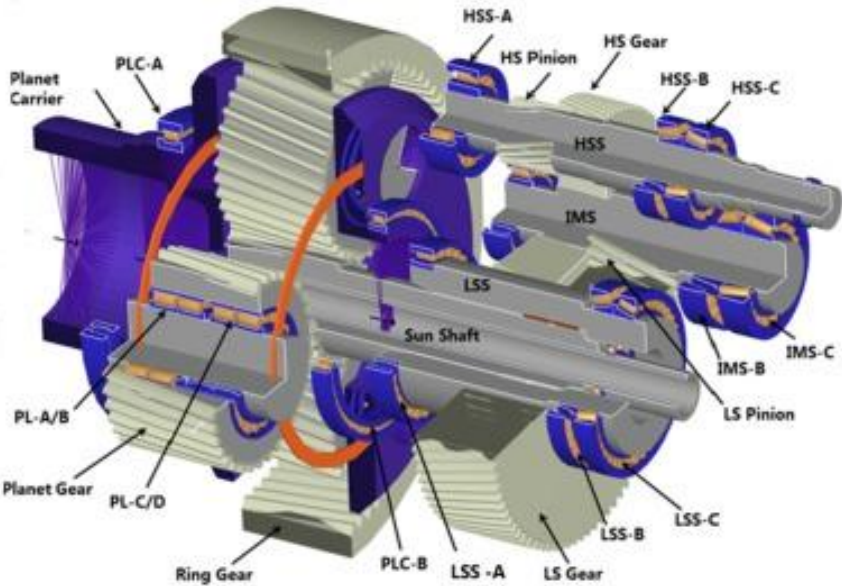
Gear Box of FWOT (Source: wind power engineering)
